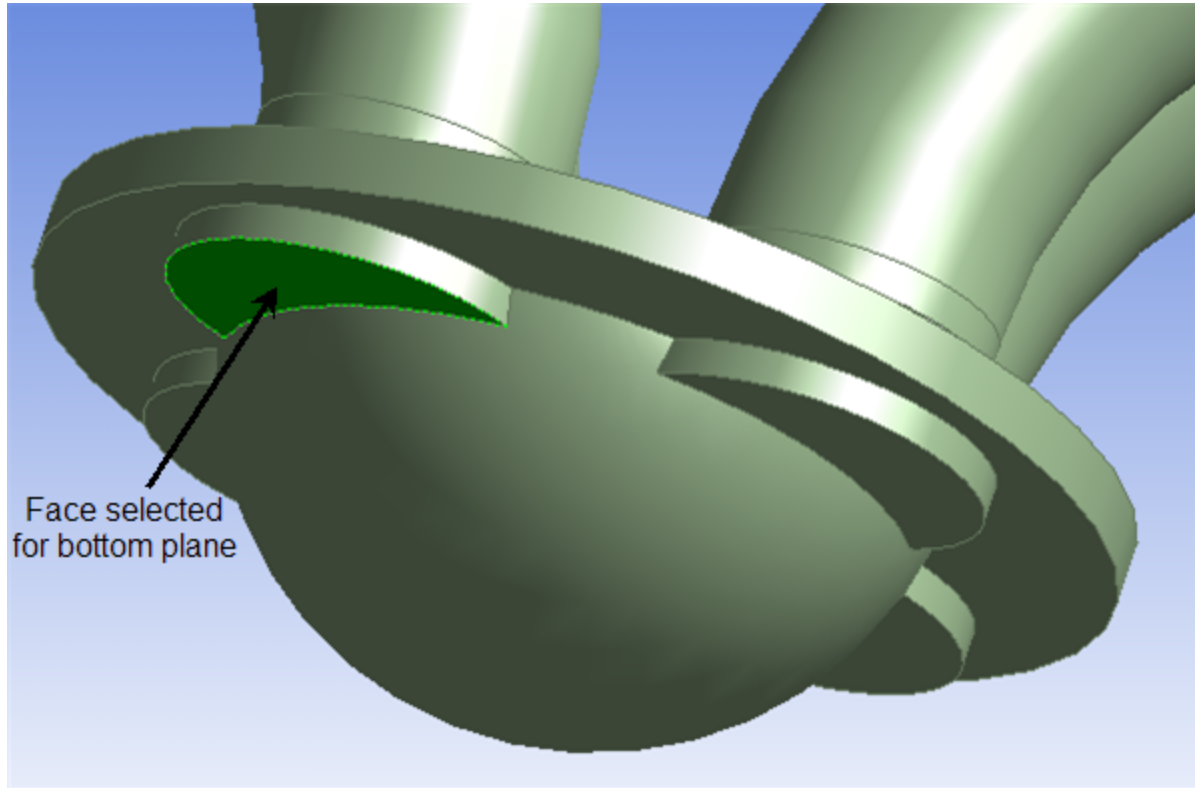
Straight Valve Engine with Pockets (p. 553) shows a straight valve engine with valve pockets. For decomposition of a straight valve pocket engine you will have to do some changes manually. Refer to [Straight Valve Geometry With Chamber Decomposition for IC Engine](#) (p. 167) for the nomenclature of the decomposed geometry.
